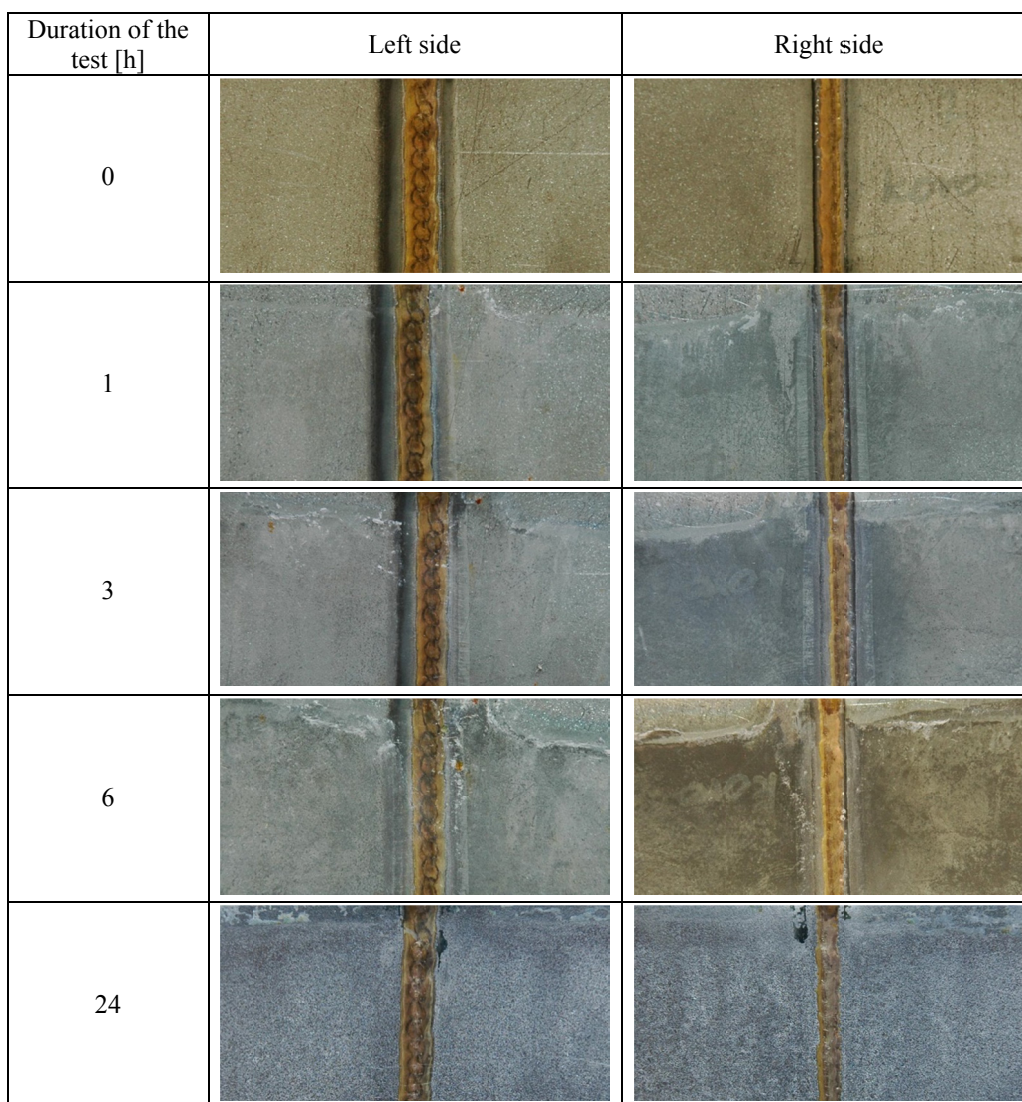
TIG brazed welded butt joint Z7 after the electrochemical corrosion resistance test based on the galvanostatic method
